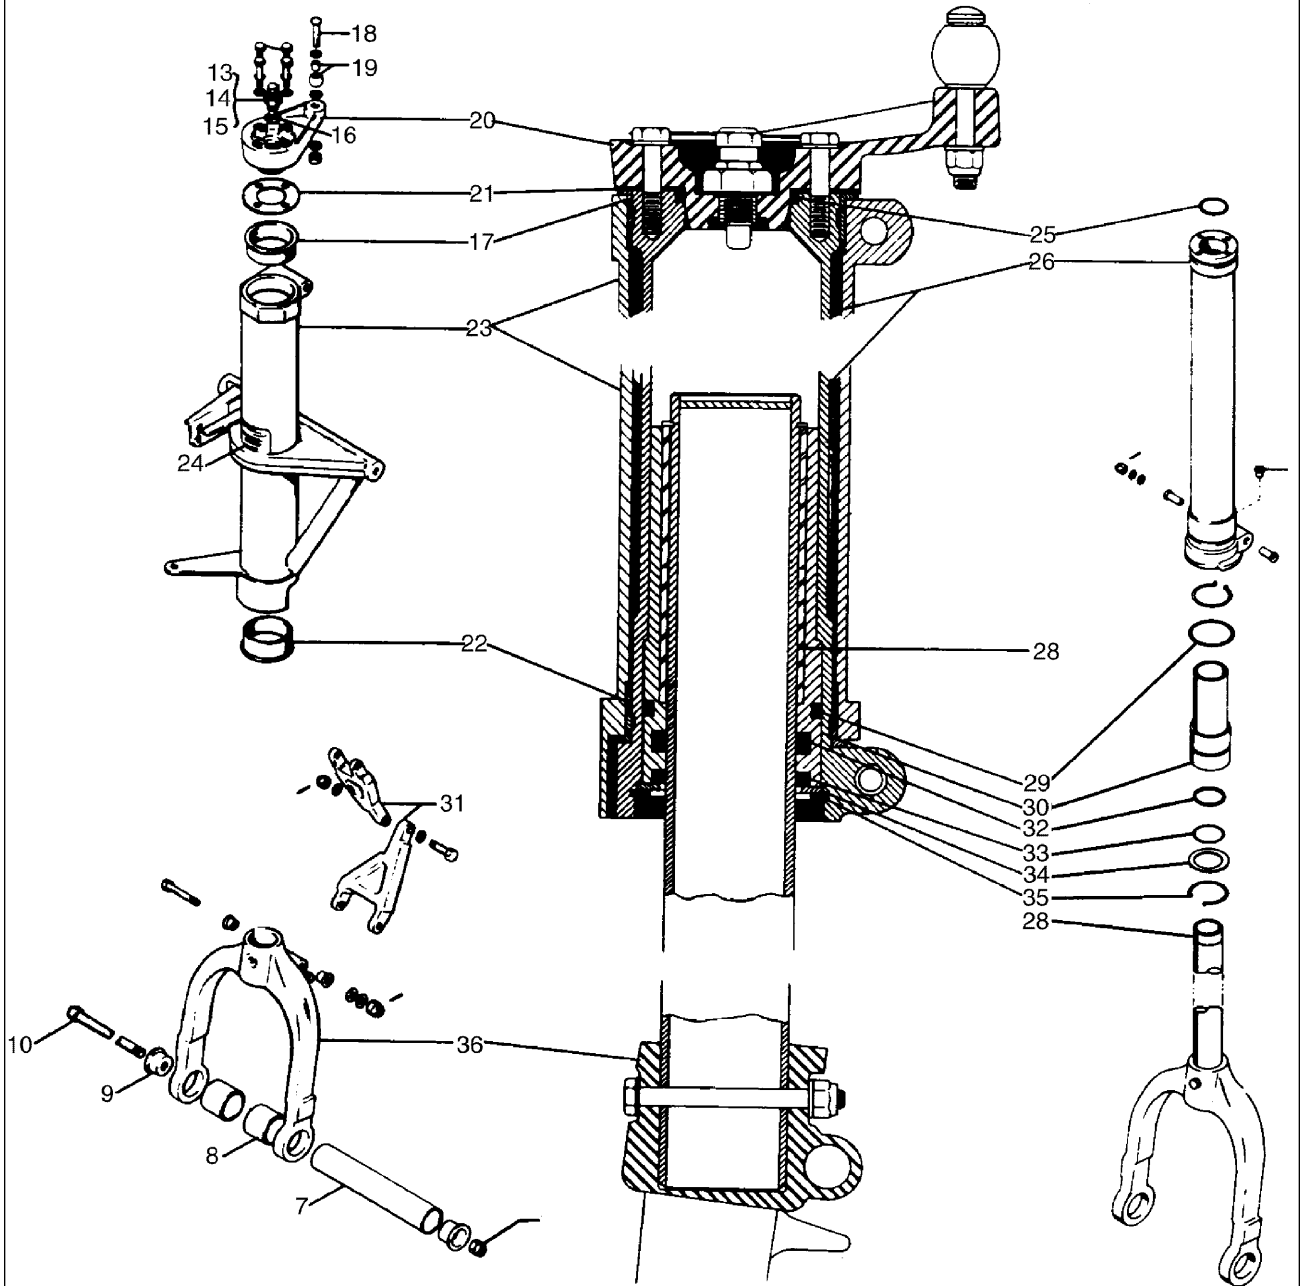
Nose Gear Oleo Strut Assembly (Sheet 2 of 2)
